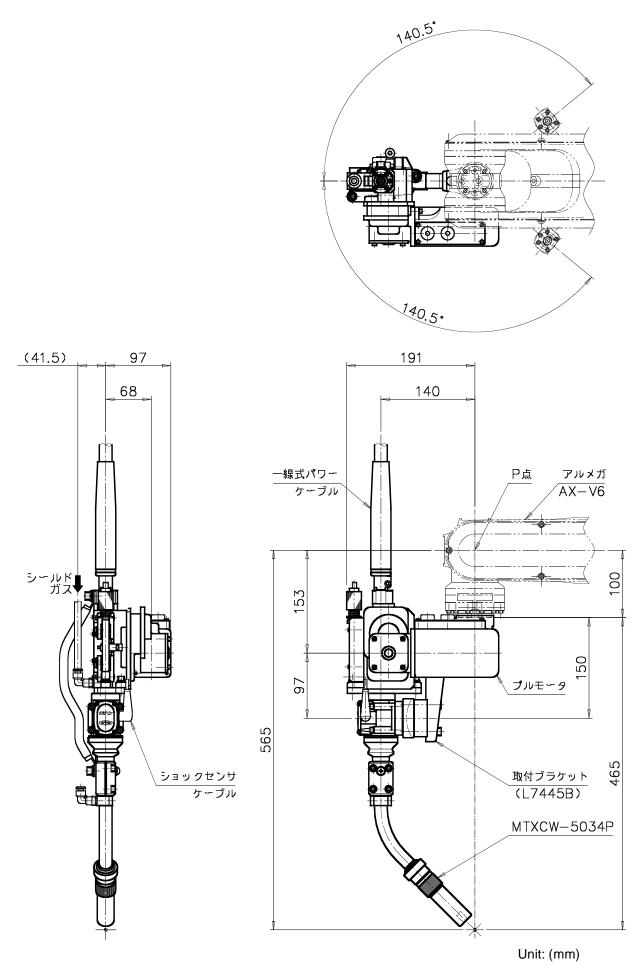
Assembly drawing of MTXCW-5034P and pull feeding unit L-7590
